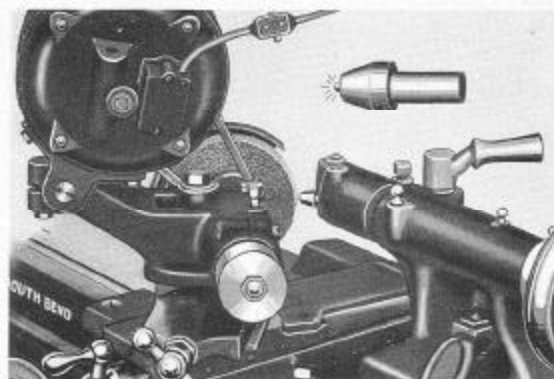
Truing Grinding Wheel with Diamond Dresser. The  $\frac{1}{2}$  carat diamond mounted in a steel shank is held in a special fixture clamped to the tailstock spindle of the lathe for convenience in truing the grinding wheel. The fixture remains on the lathe.
